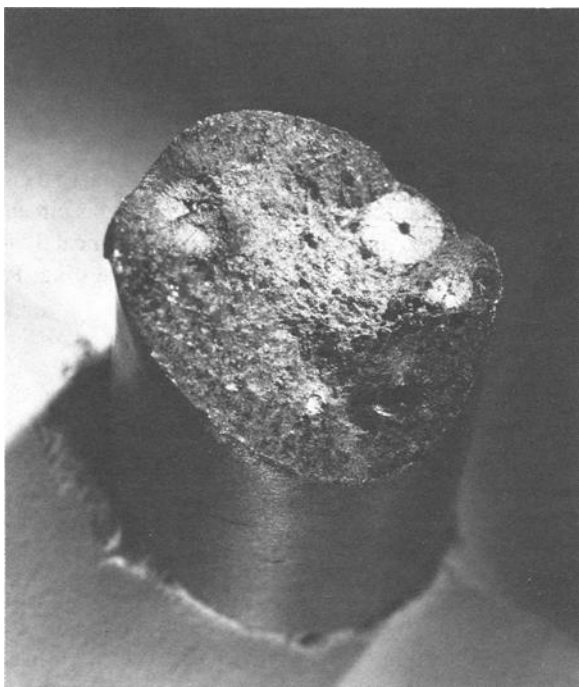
Fisheyes in fracture of a broken tension test.
